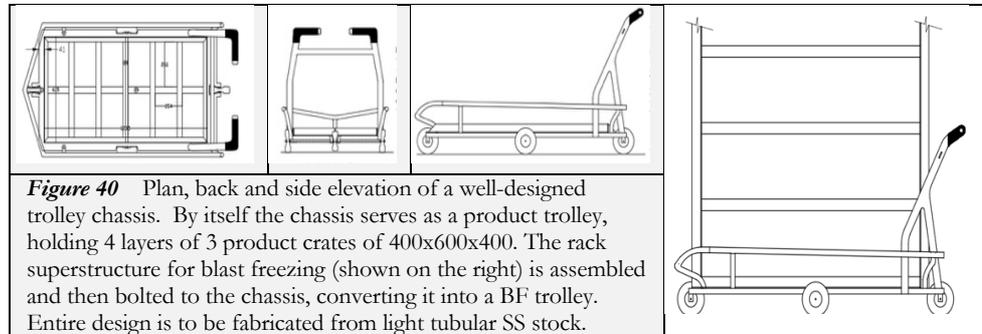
Plan, back and side elevation of a well-designed trolley chassis. By itself the chassis serves as a product trolley, holding 4 layers of 3 product crates of 400x600x400. The rack superstructure for blast freezing (shown on the right) is assembled and then bolted to the chassis, converting it into a BF trolley. Entire design is to be fabricated from light tubular SS stock.
